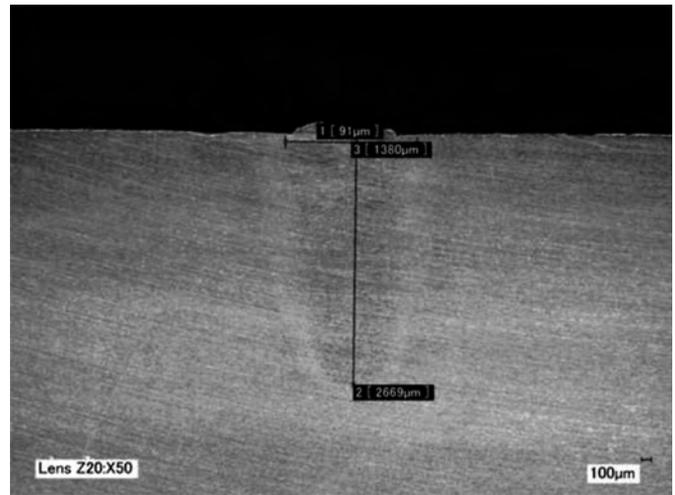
Picture of blind weld, with 3 mm defocus.
